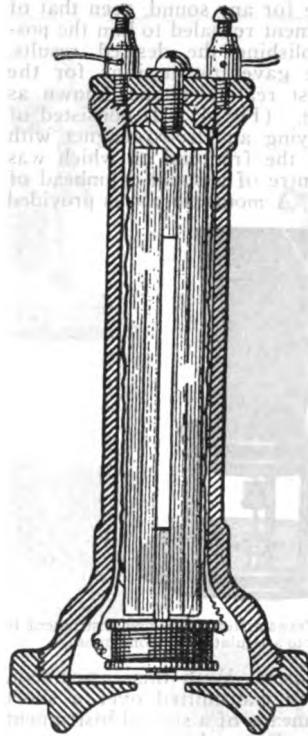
Cross-section of improved Hand Telephone, with hard rubber handle and ear-piece.
